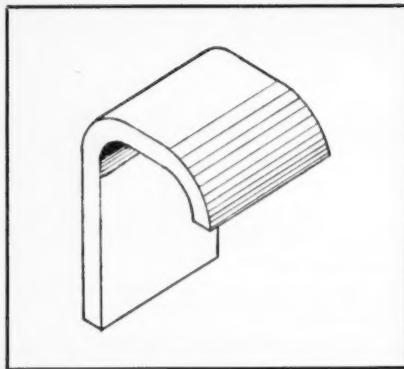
The inside bends of this flange are 3 to 1 ratio but the radii are about two thicknesses apart, thereby producing a flat at the top of the roll.
